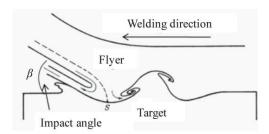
Transient state of welding process at weld interface in impact welding [3].
